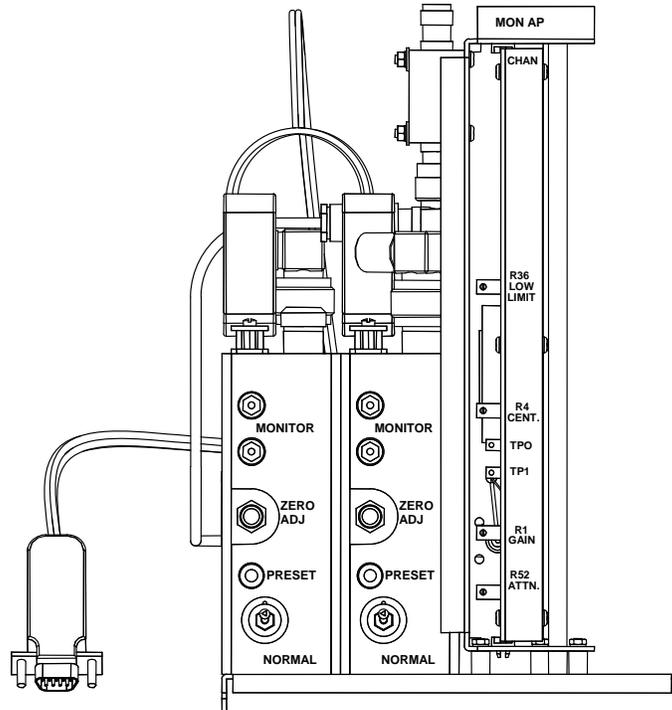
Autophaser Assembly, Type AP-105, Front View
